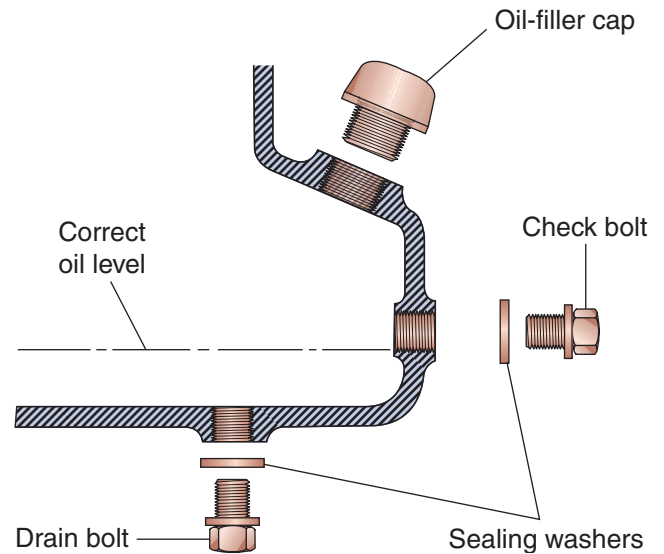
A check bolt is used to verify that the correct amount of oil is in the engine.
